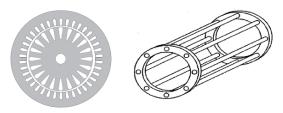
Cross-section and Rotor Cage of the Induction Machine
